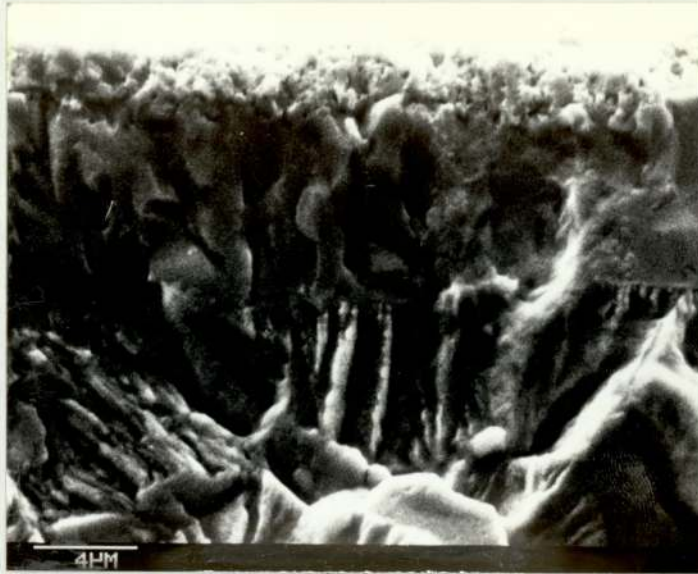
Fatigue fracture of compound layer in nitrocarburised 080M15 at the notch root, root radius 0.13 mm, (midsection),  $N_i = 191,000$
